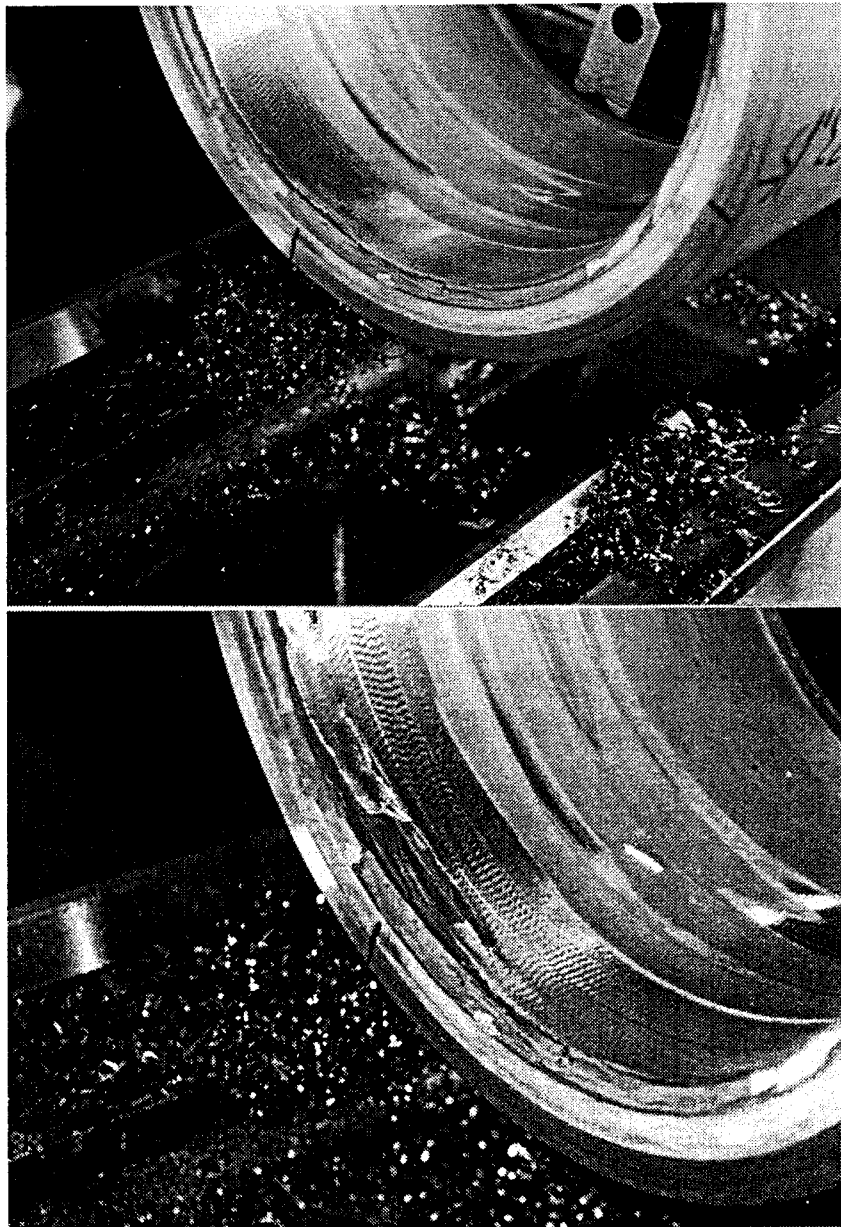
Ferrite cracked when the inner capsule was being removed. The two stainless steel (SUS) rings that were added on the ends of the copper pipe to facilitate welding the end flanges. SUS/SUS welding is much easier and stronger than SUS/copper welding. Due to less ductility of SUS, more thermal stress was accumulated in ferrite and was released upon removing the capsule.
